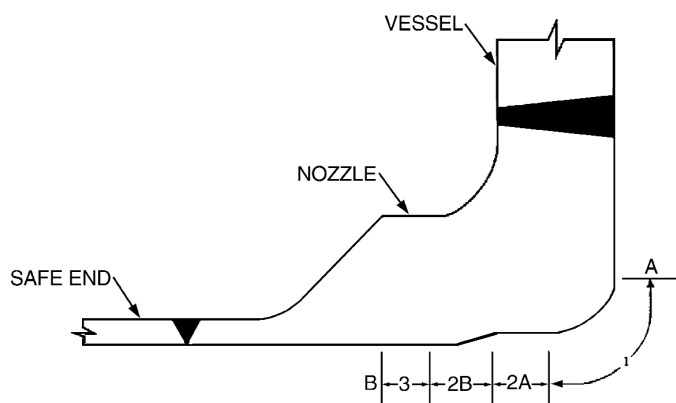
BWR FEEDWATER NOZZLE INSPECTION ZONES (CLAD-REMOVED NOZZLE)
